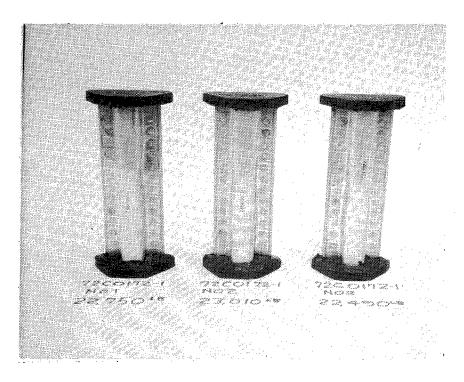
Failed Spotwelded Crippling Specimens Showing Classical Buckling of Stringer Elements. (Neg. 126985B)
